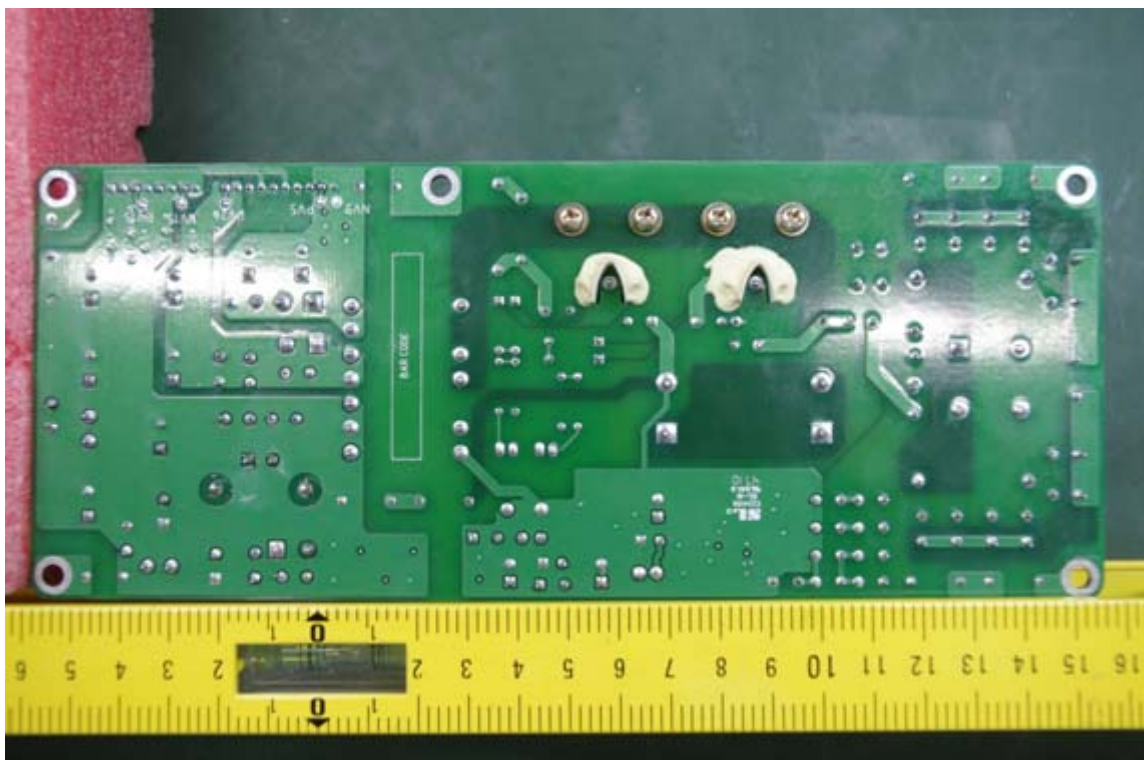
Board SNT\_3320\_PCB\_DY, traces side view
